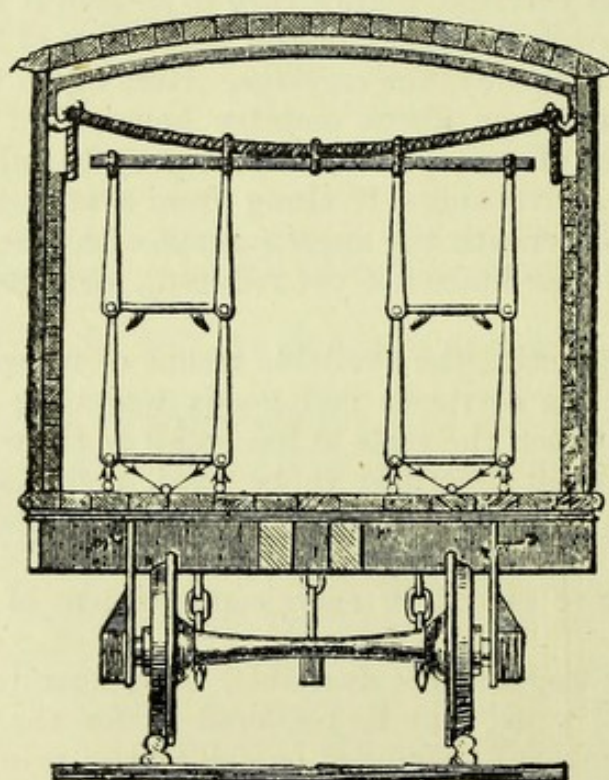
TRANSVERSE SECTION OF A GOODS WAGGON FITTED ON ZAVODOVSKI'S PLAN.
